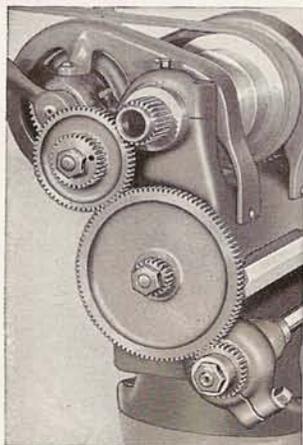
Gear Arrangement for Cutting Right-Hand Screw Threads.
